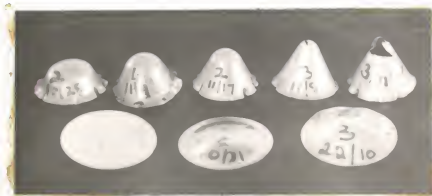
The workpiece (front, left) and formed pieces shaped to various amounts. The sample in the center of back row shows the maximum forming obtained without rupture of the explosively formed piece. Samples formed to a greater degree were always cracked or ruptured.
